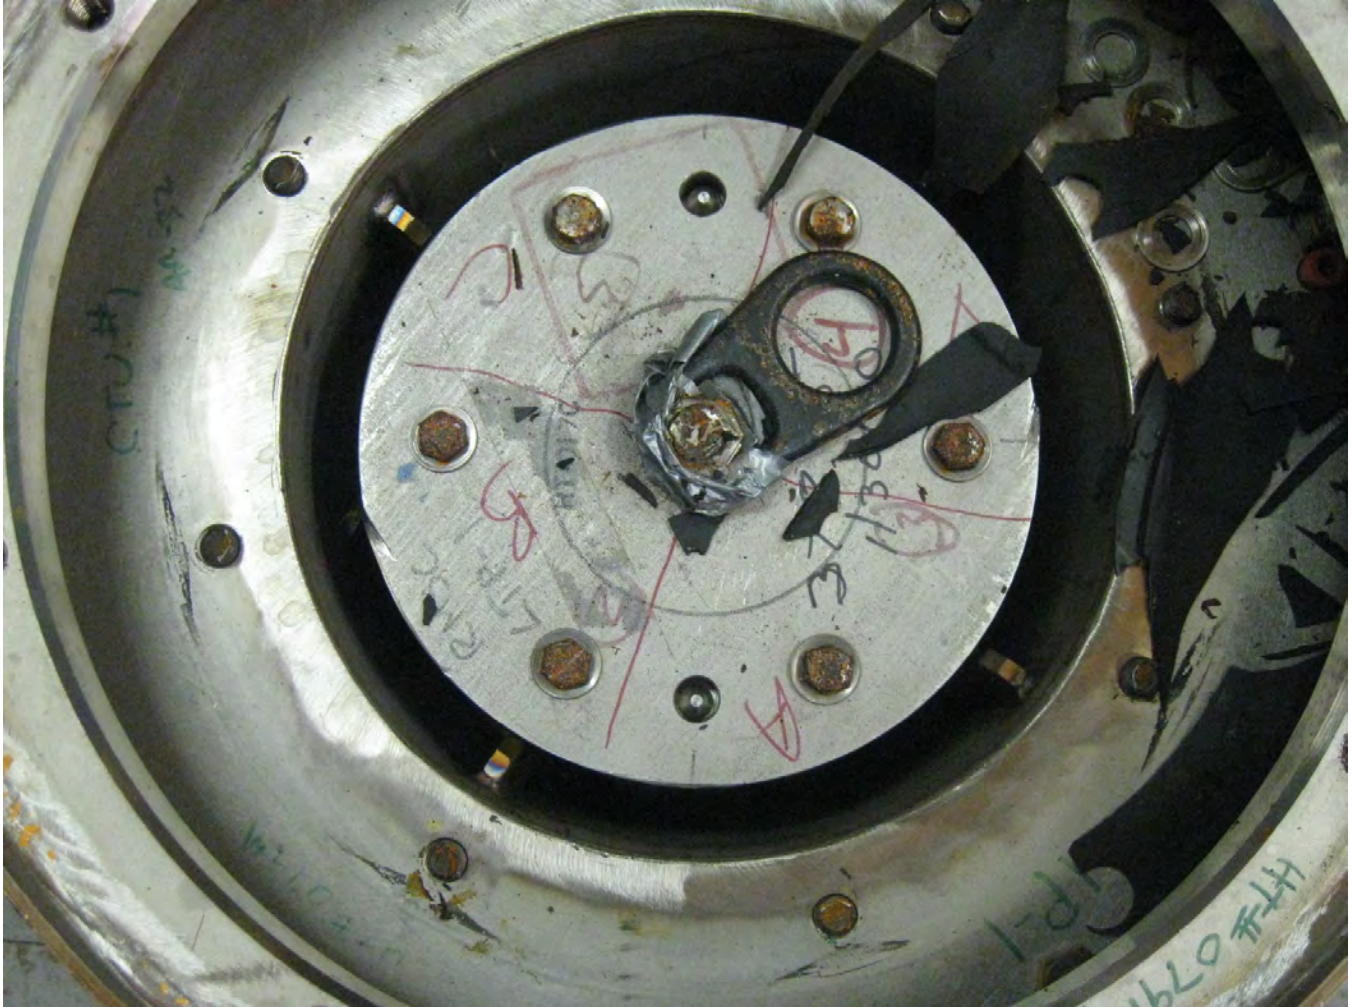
CTU-1 Post-Test Disassembly: View of RMSC Payload in Cavity
